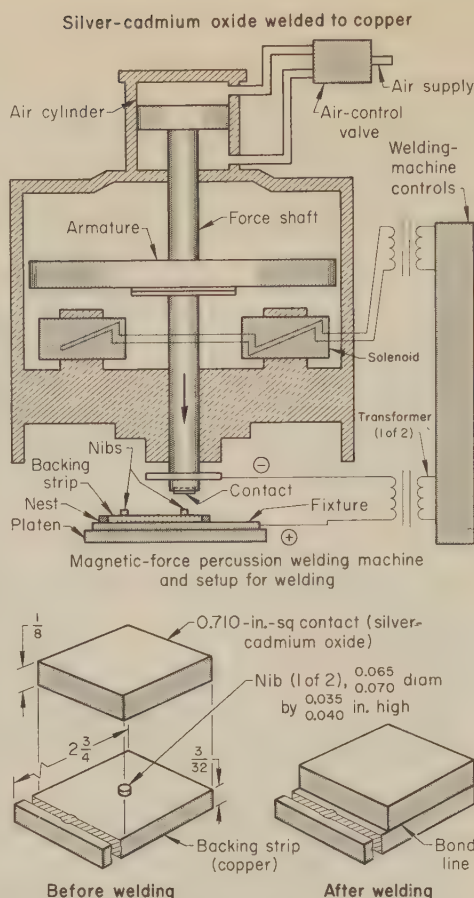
Silver-cadmium oxide contact and copper backing strip that were magnetic-force percussion welded in the machine and setup shown (Example 180)
